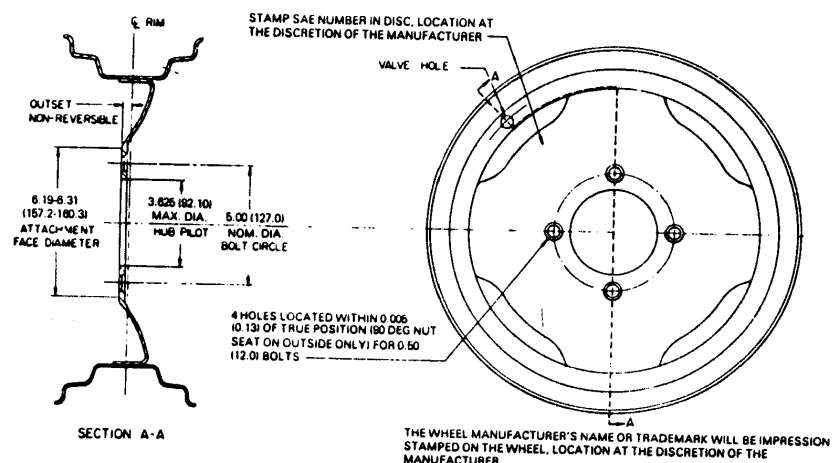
4 BOLT, 5 IN. BOLT CIRCLE GROUP
